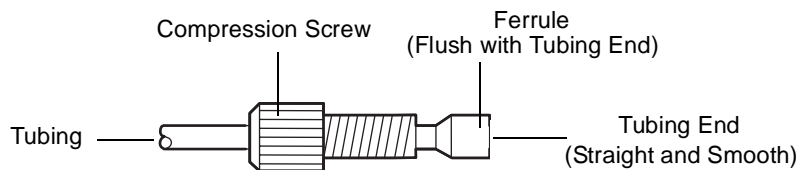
Reverse Ferrule and Compression Screw Assembly
